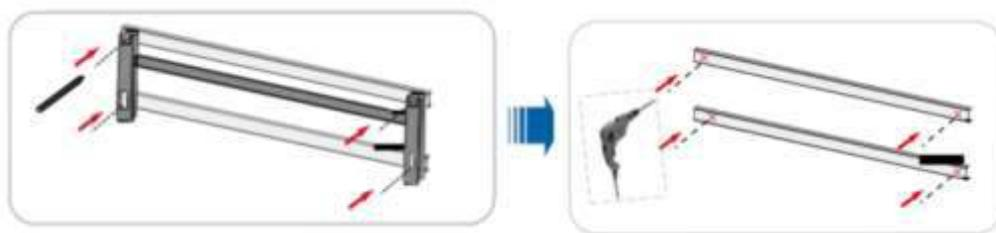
Level the assembled mounting-bracket and mark the positions for drilling holes
